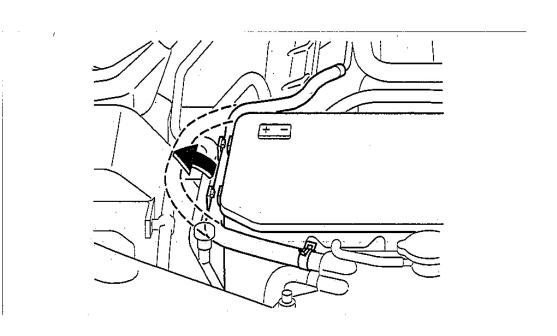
View Of Rubber Hose Courtesy of MAZDA MOTORS CORP.
